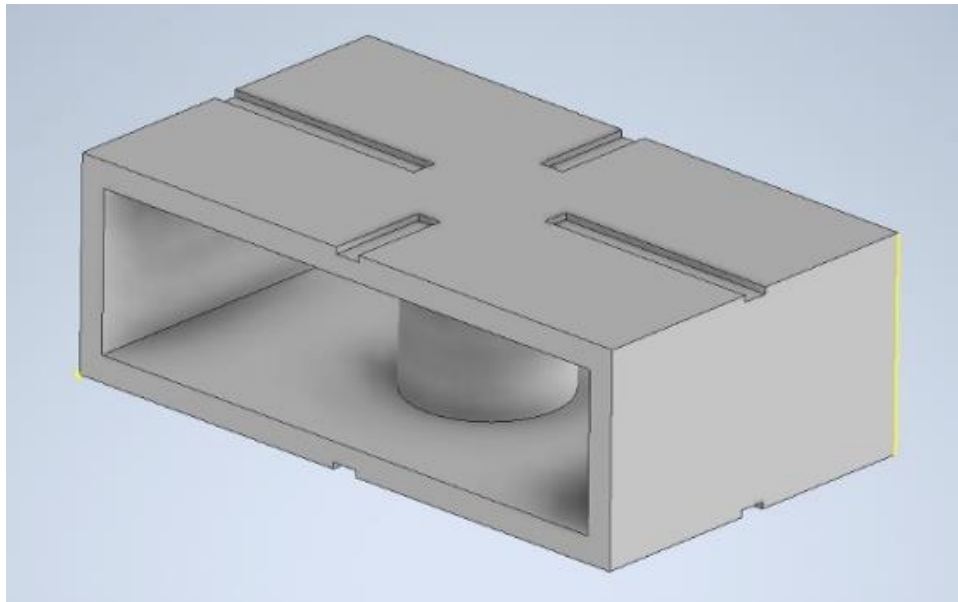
CAD drawing of electromagnet yoke. The dimensions of this model were matched to the dimensions of the yoke in the simulated electromagnet. The yoke was made of 5 total pieces of 1018 low carbon cold rolled steel; two 8.89 cm × 3.81 cm × 0.635 cm (3.5 in × 1.5 in × 0.25 in) plates, two 8.89 cm × 15.24 cm × 0.635 in (3.5 in × 6 in × 0.25 in) plates, and the 3.81 cm diameter core, which was turned on the lathe to a length of 3.81 cm. The two smaller plates were secured in between the two larger plates such that the final outer dimensions of the yoke were 15.24 cm by 8.89 cm × 5.08 cm. The grooves seen in the yoke were initially meant to help align the detectors, however 3D printed parts were used instead because of the ease of manufacturing, as seen in Figure 21.
